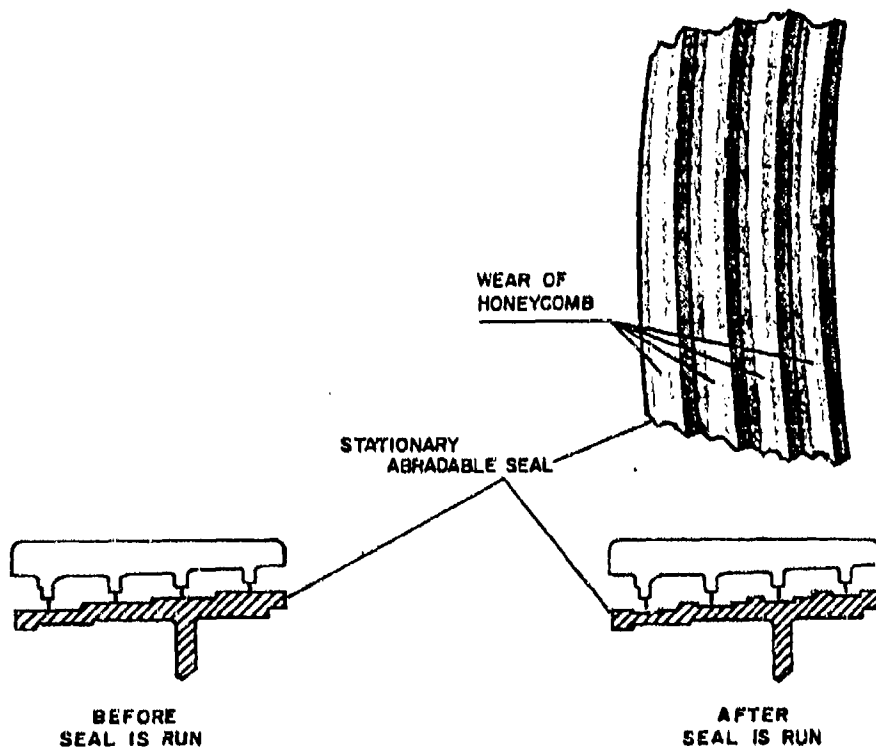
This sketch shows typical abradable seal axial and radial wear. This is an interstage compressor seal from a large bypass engine.
